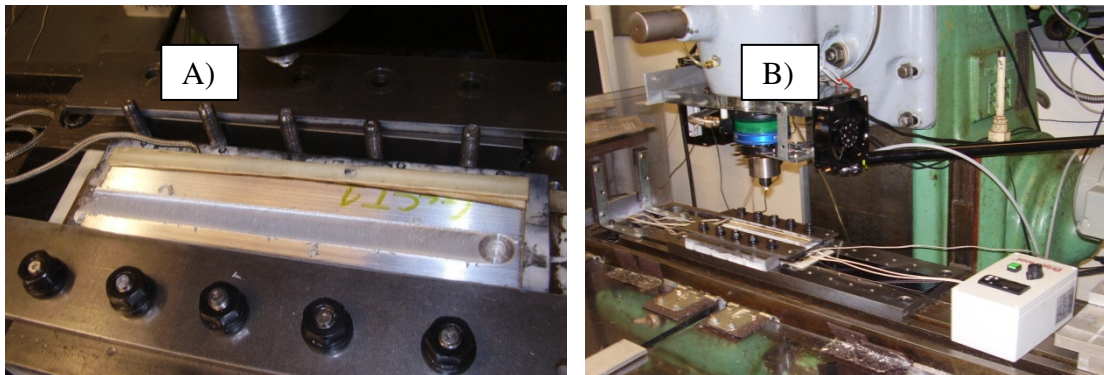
Heated FSW System (A) A picture of the anvil and clamping set-up with one clamp removed. One of the J-type braided thermocouples can be seen in the aluminum. (B) The entire welding set-up including the BriskHeat Thermocouple Controller.
